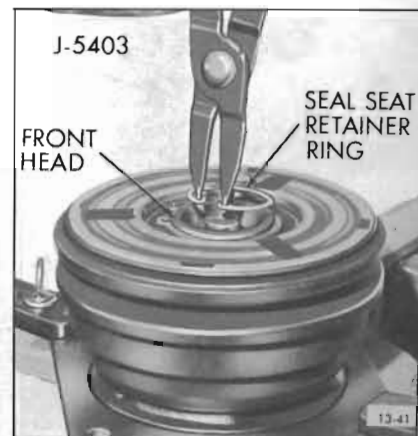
Removing or Installing Shaft Seal Seat Retaining Ring
